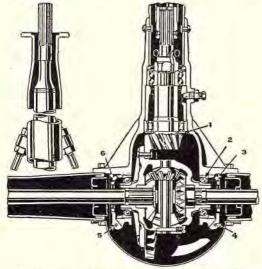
Fig. SA. Differential mounted on angular contact ball bearings; pinion mounted on ball bearings and a straight roller bearings. Type of gearing is spiral bevel. At the left, is shown the front part of the torque tube and the radius rods. (Buick Series '40" 1936.)
